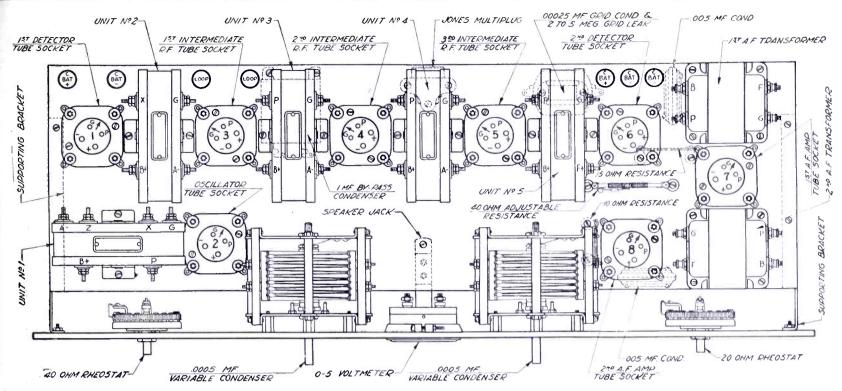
Top view of receiver showing arrangement of parts on sub-panel
